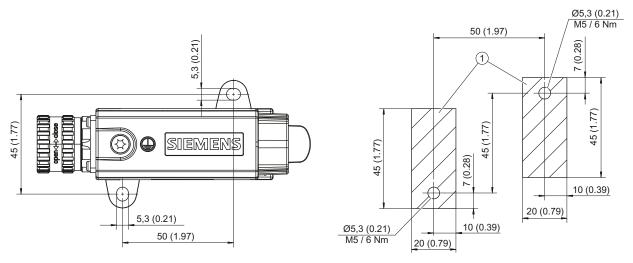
Dimension drawing of the Sensor Module External SME20, all data in mm and (inches)
